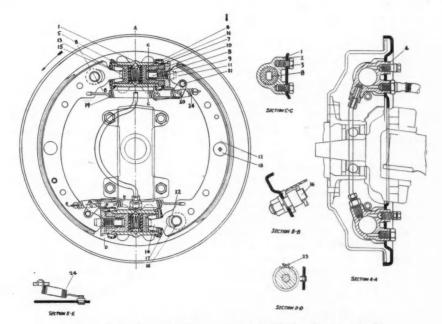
Bendix hydraulically-operated twin-cylinder Twinplex brake. I, hydraulic cylinder; 2, backing plate; 3, cap screws securing cylinder to backing plate; 5, toe piston; 6, heel piston; 7, flange on heel piston bearing against end of cylinder; 8, depression in piston 6 and flattened end of adjusting screw 9; 10, adjusting nut; 11, heel end of shoe 12; 13, bearing plate of toe piston; 14, toe end of shoe 12; 15 and 16, boots sealing ends of cylinders; 19, shoe-retracting springs; 20, locking clip for locking adjusting nut; 23, V-shaped end of lock clip
